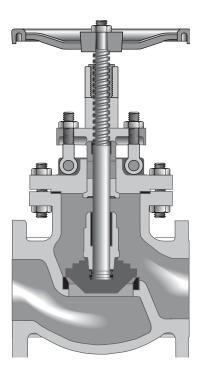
Flanged Figure 1712 Butt Weld
